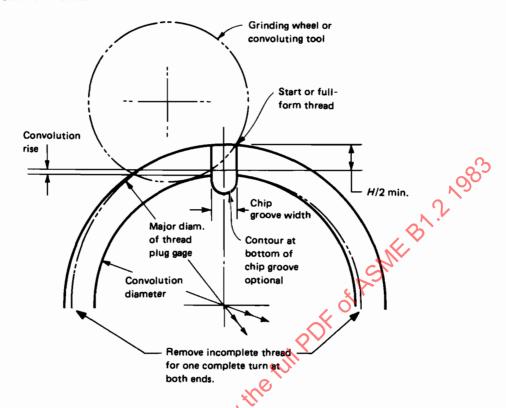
PARTIAL END THREADS AND CHIP GROOVES
